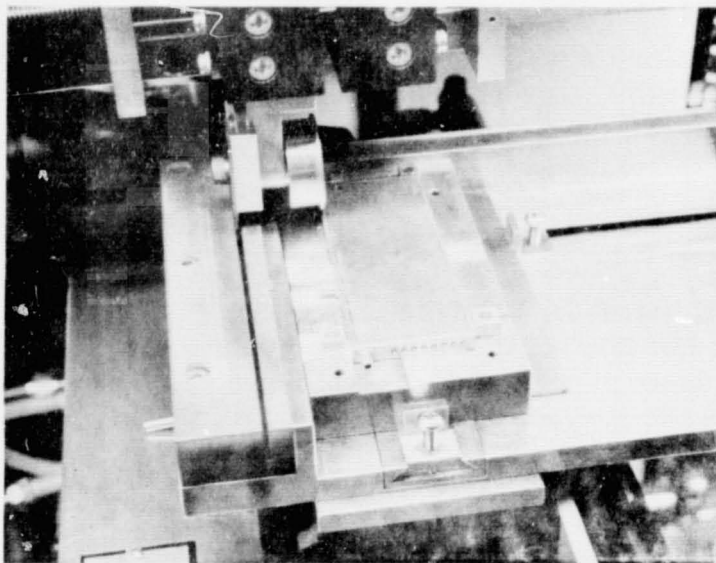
Close-up View of Electrode and Welding Fixture
